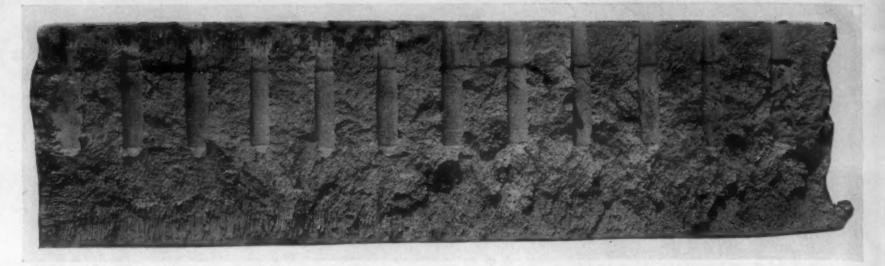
Cross-Sectional Structure of 22-in. Side of Ingot on Iron Stool.
